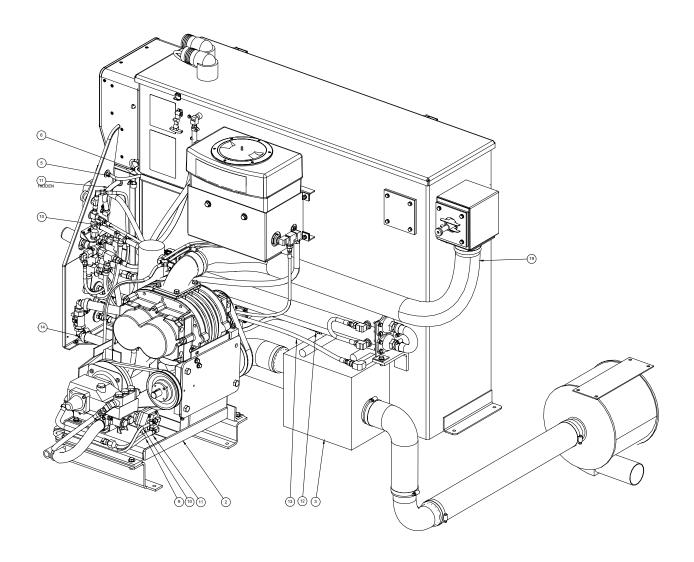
CDS 4.6 Machine Assembly - Rear View D-7144 Rev -
